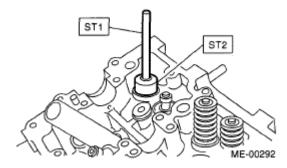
Inserting ST1 Into Valve Guide Using Valve Guide Remover ST1 (499767200) Courtesy of SUBARU OF AMERICA, INC.
